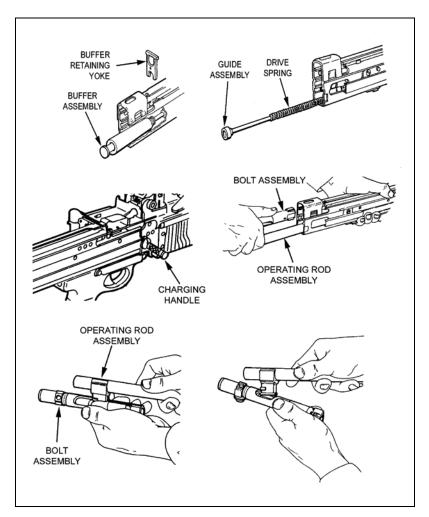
Removal of the buffer, operating rod, and bolt assemblies.
